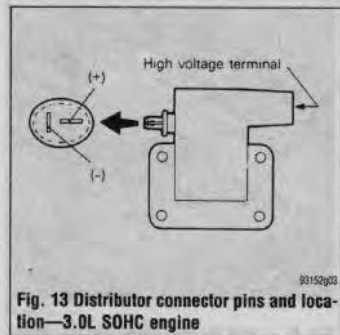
Distributor connector pins and location—3.0L SOHC engine
